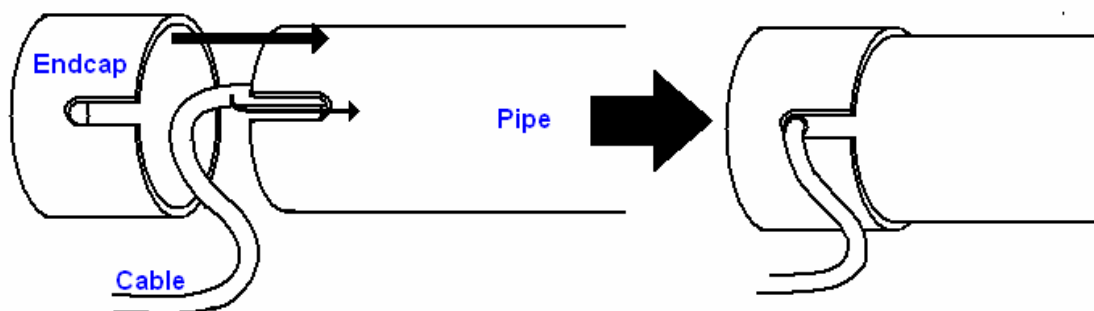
Cable seal method used in the expanded chamber prototype of the pistonphone. The cable fits into notches cut into the end-cap and pipe. These notches close together, forming a complete seal around the cable.
